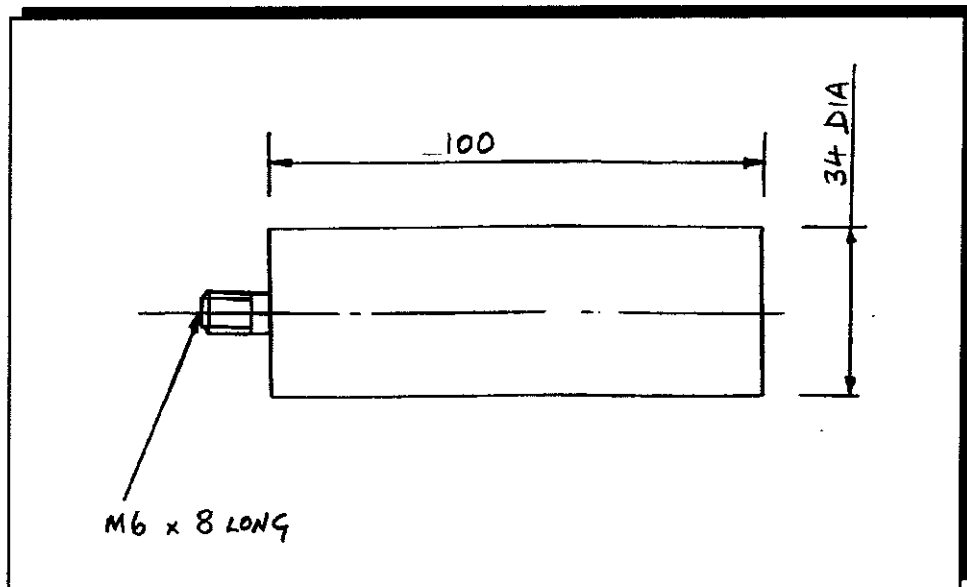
Item 1 Magnetostrictive Actuator Outline Drawing
